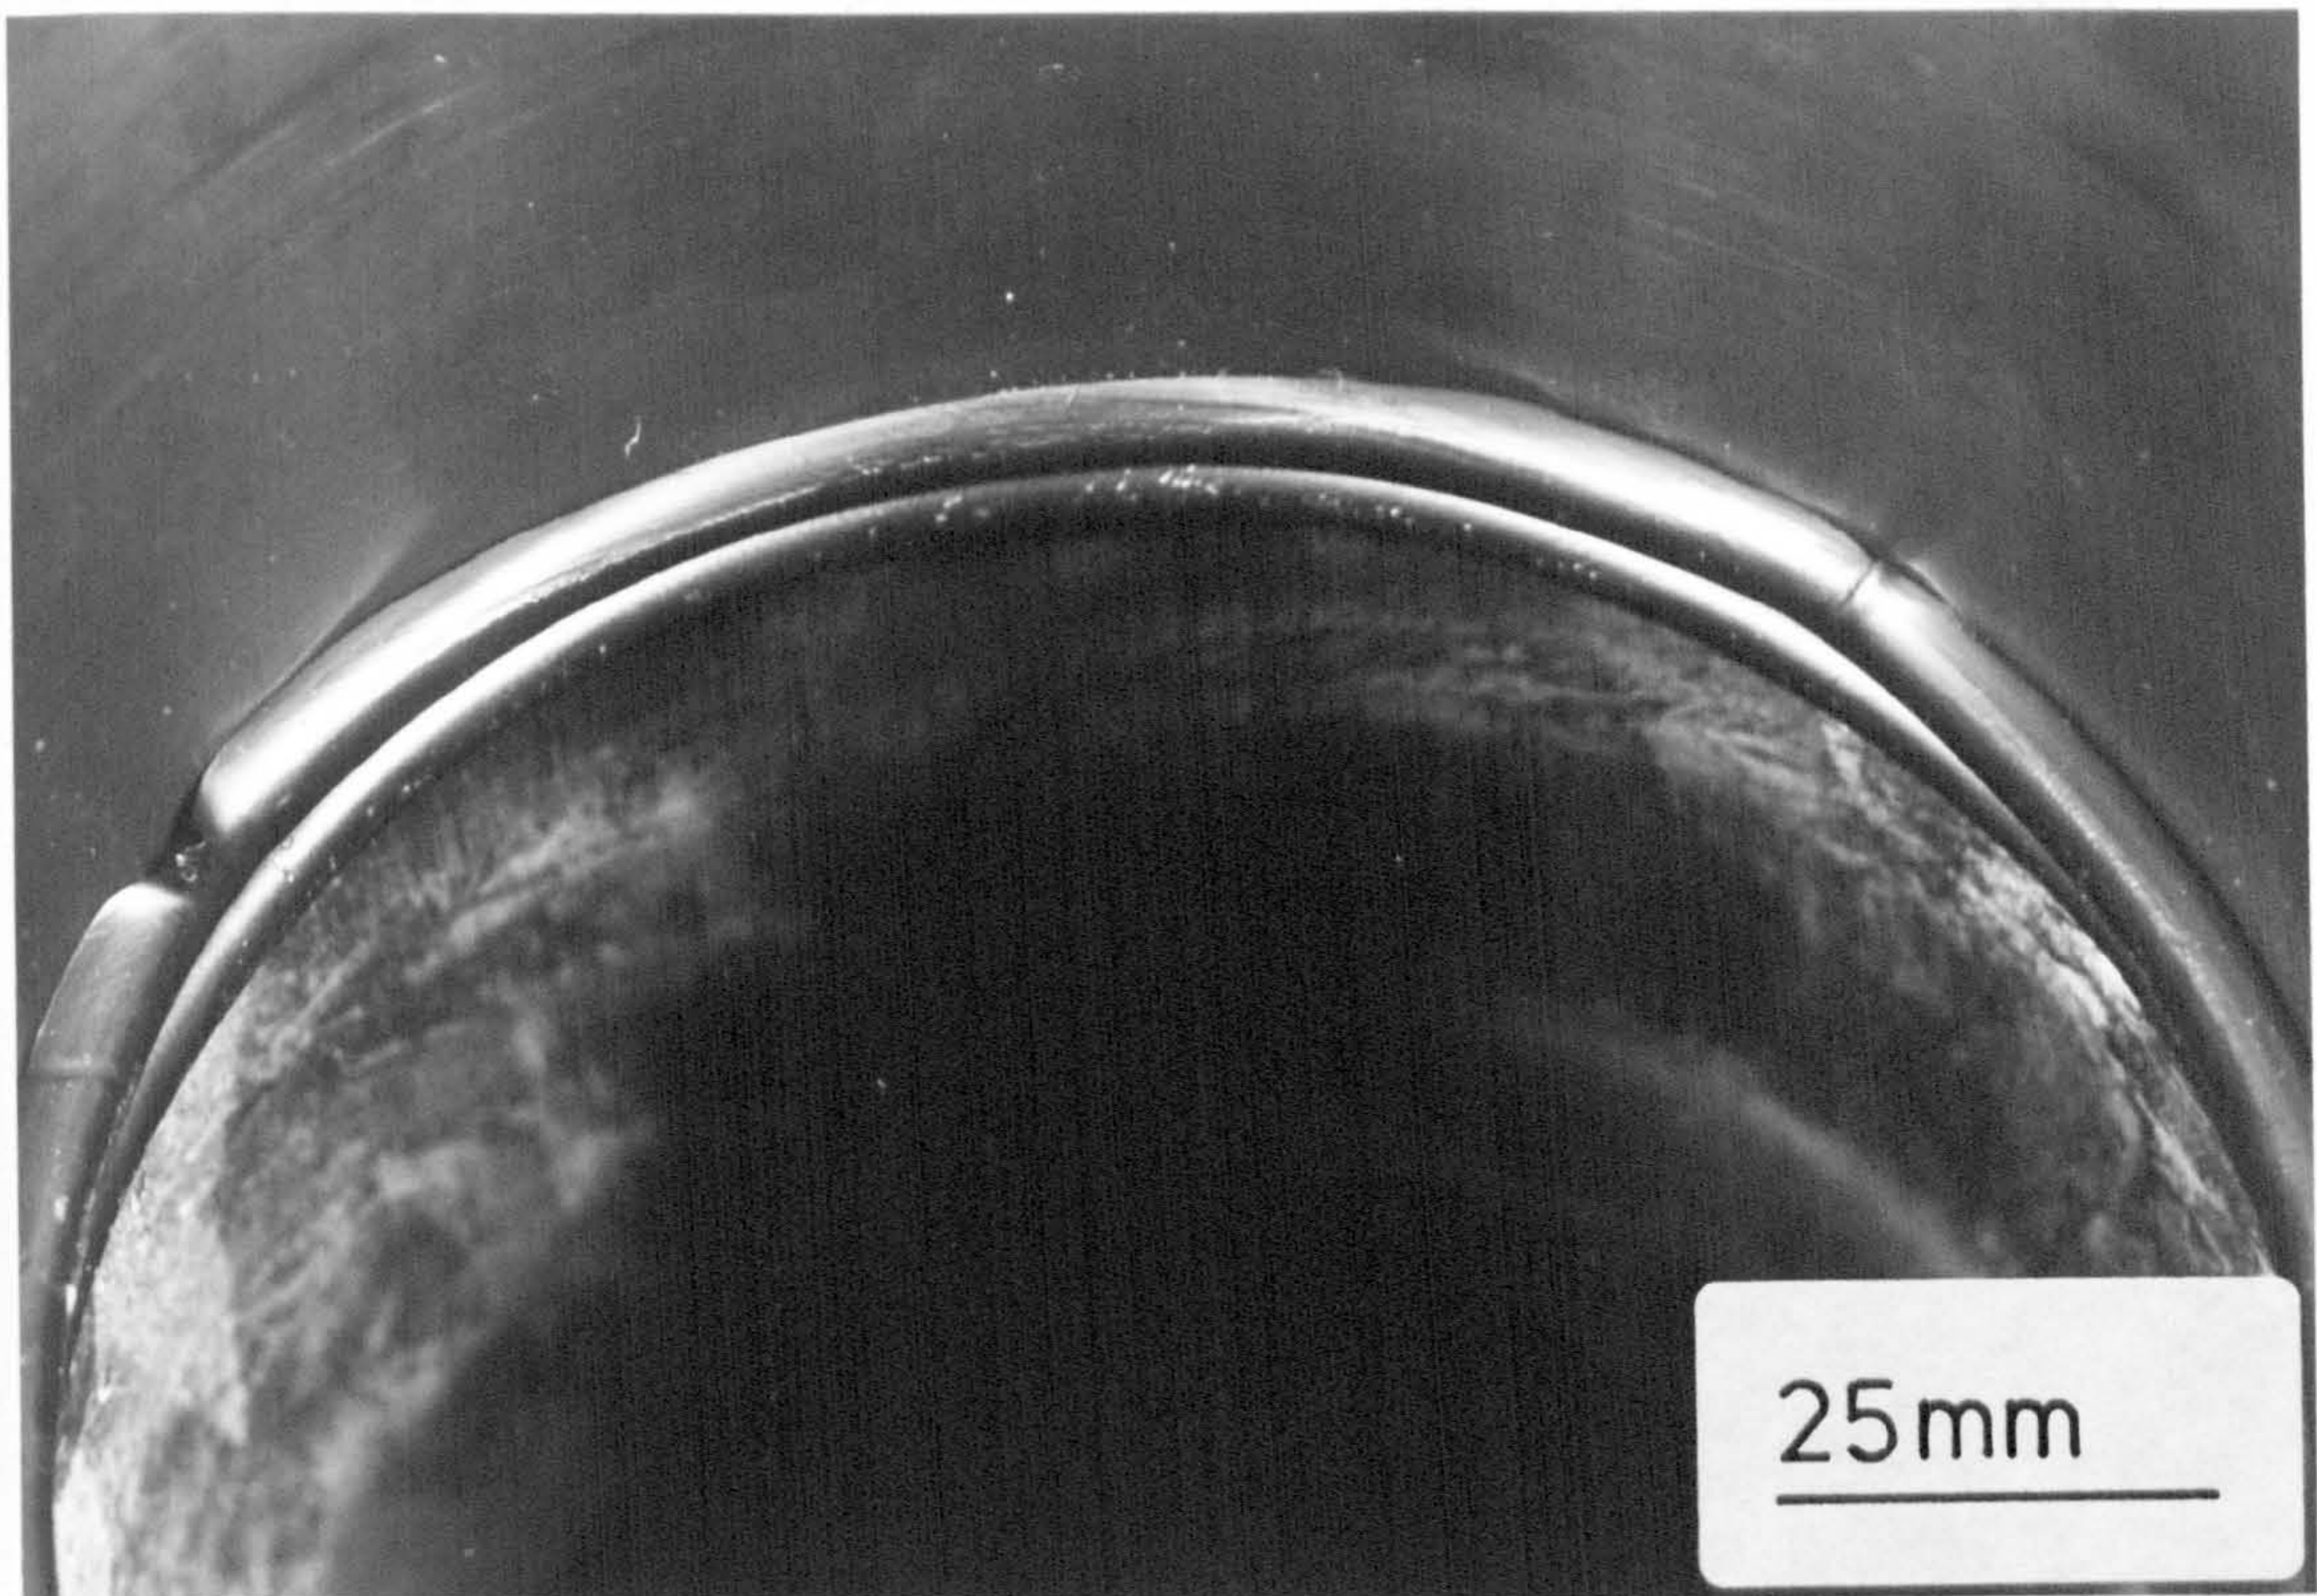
Weld bead discontinuities between an injection moulded stub flange and extruded pipe.
